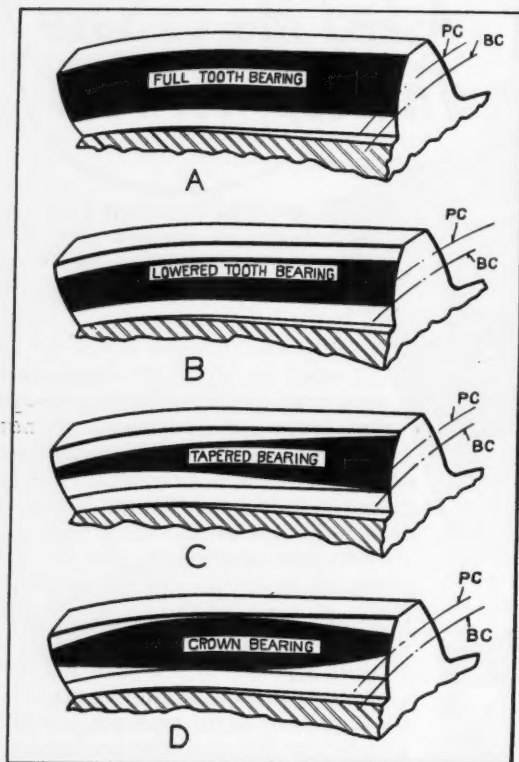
Sections of four helical gear teeth showing different kinds of tooth bearings.
